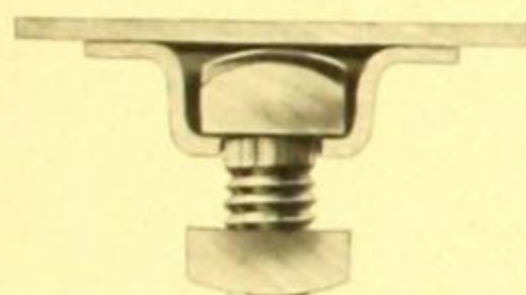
View of Clip Attached to Bottom of Tub with Bolt in Place
